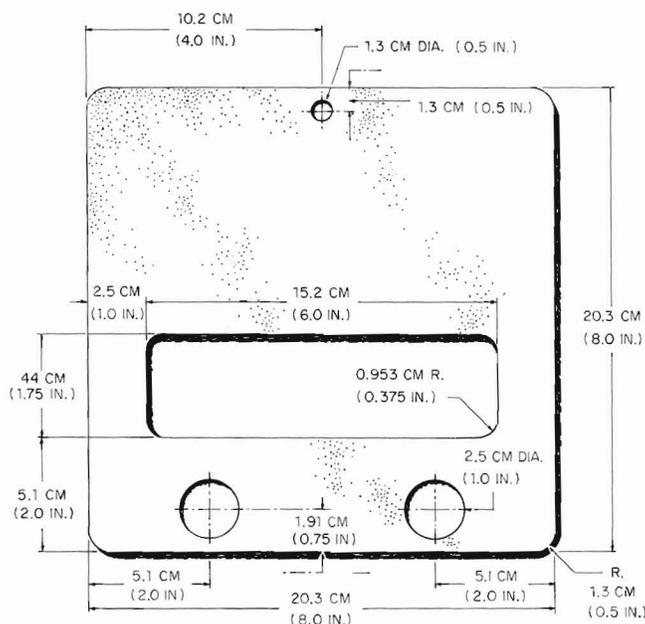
Catch escape door with sublegal escape vent— Woods Hole pot test.
